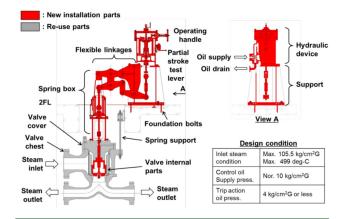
Modernised hydraulic trip and throttle valve (TTV).
